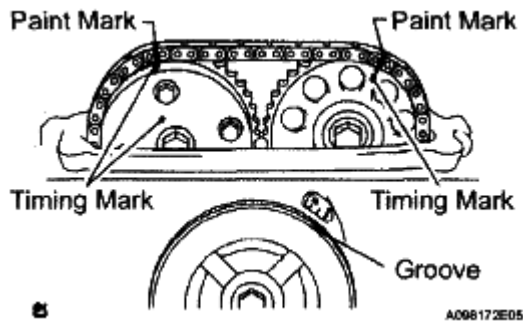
Identifying Timing Marks On Chain And Camshaft Timing Gears
